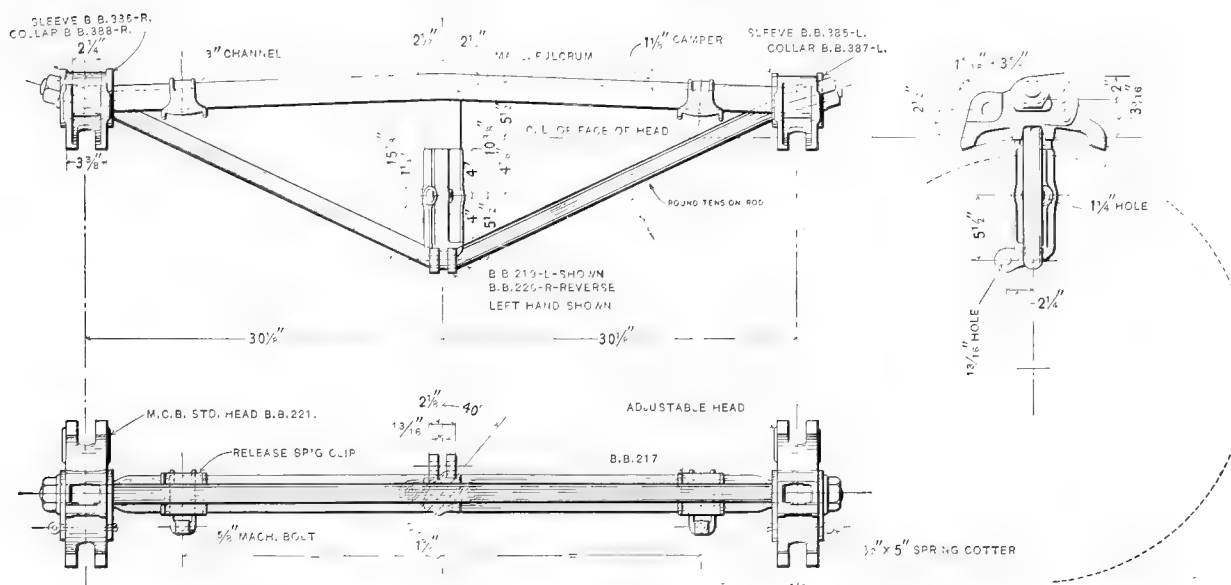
Hercules Brake Beam for Four-Wheel Passenger Train Car Trucks. American Steel Foundries.
